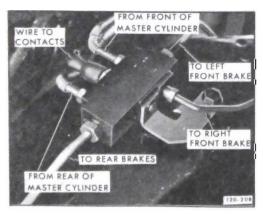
II Distributor and Brake Failure Warning Switch Assembly
